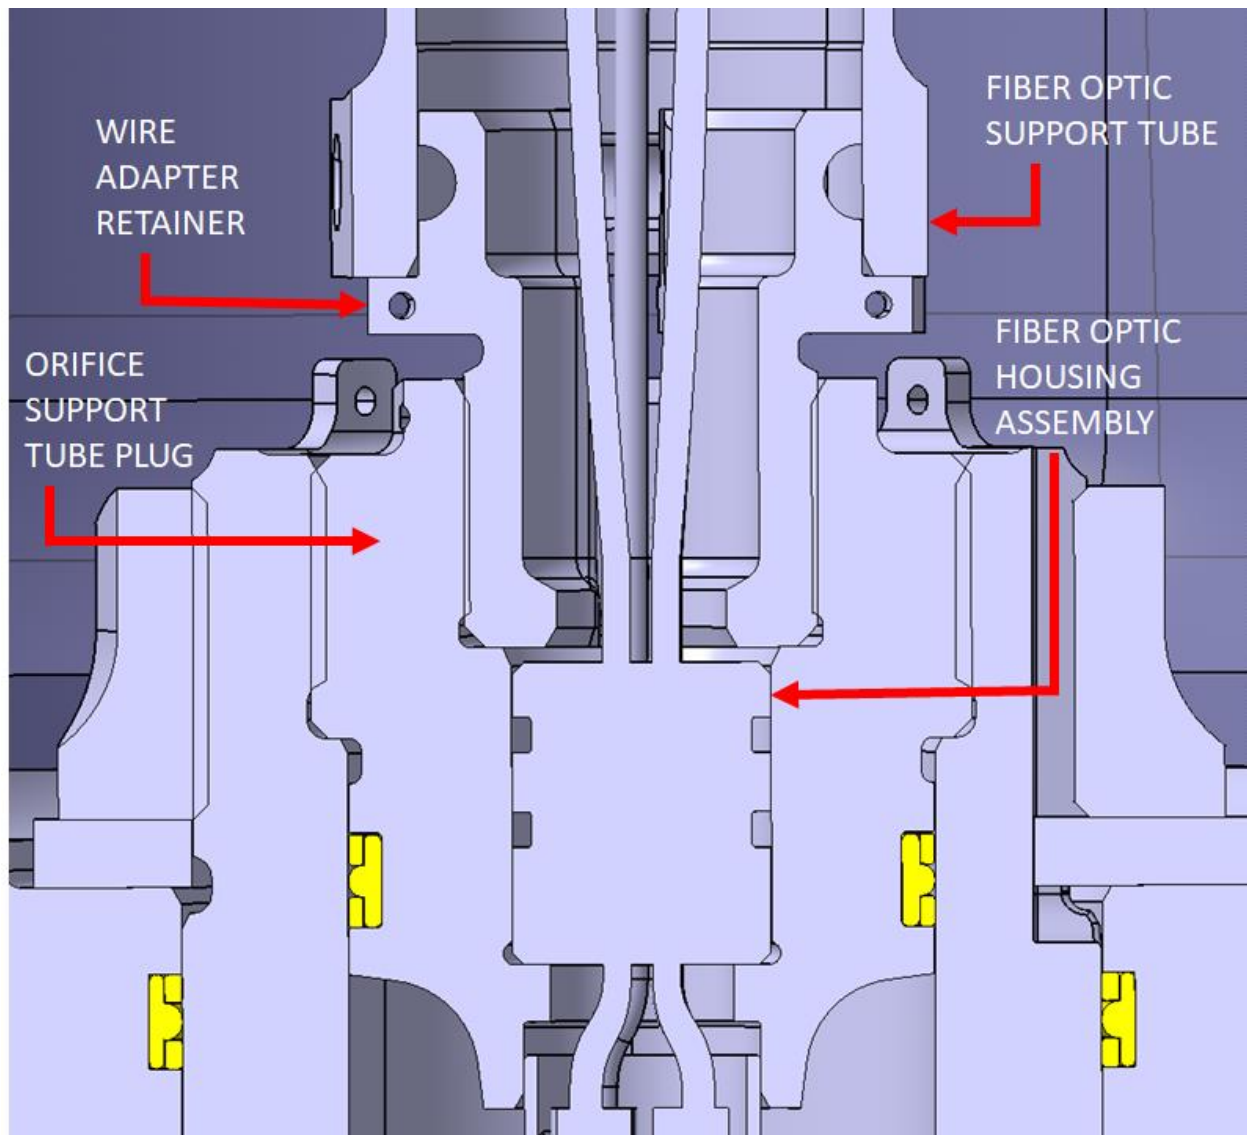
Section View of Current OST Plug, Wire Adapter Retainer, Fiber Optic Support Tube, and Fiber Optic Housing Assembly
